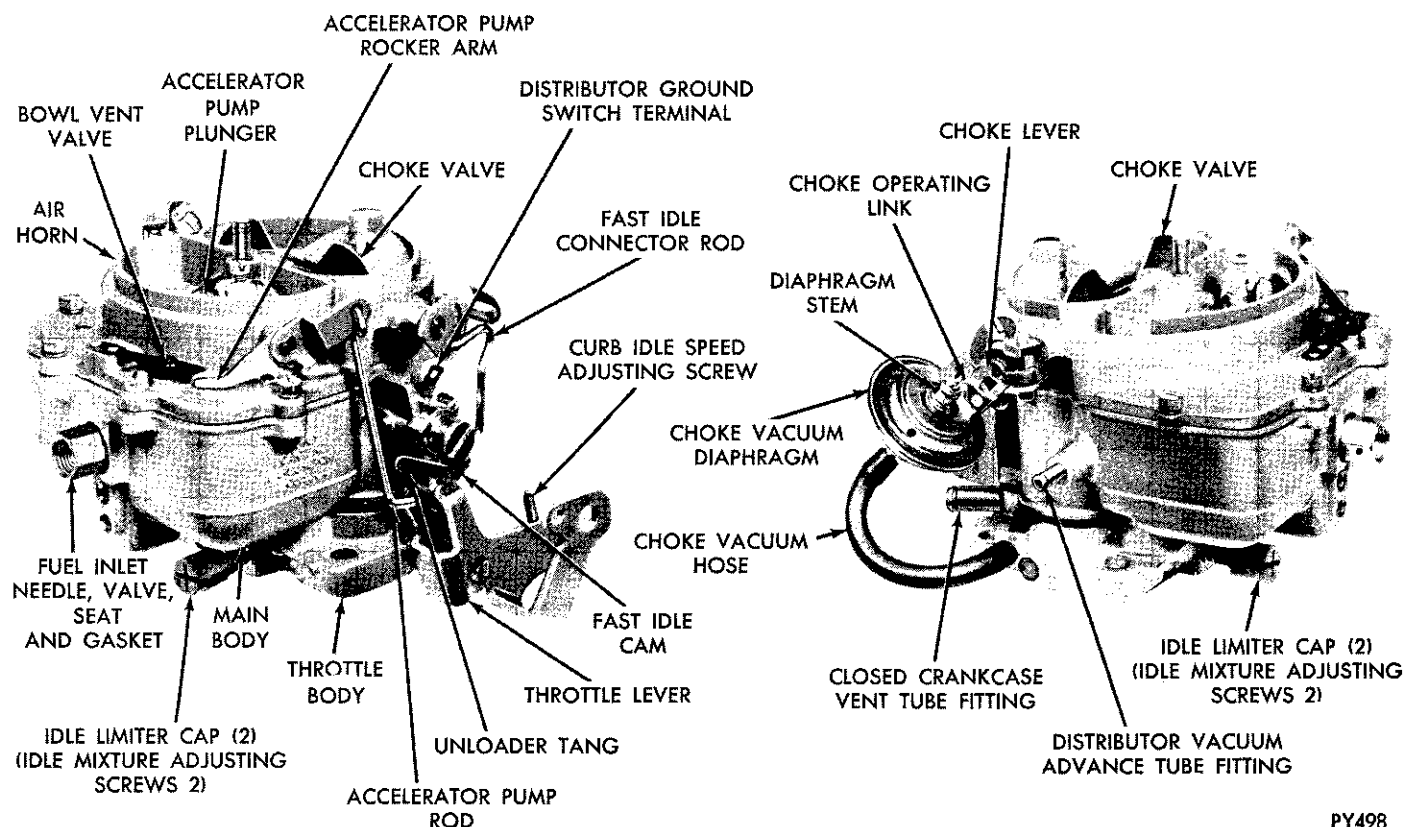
Carburetor Assembly (BBD-1-1/2 inch) C.A.S.
